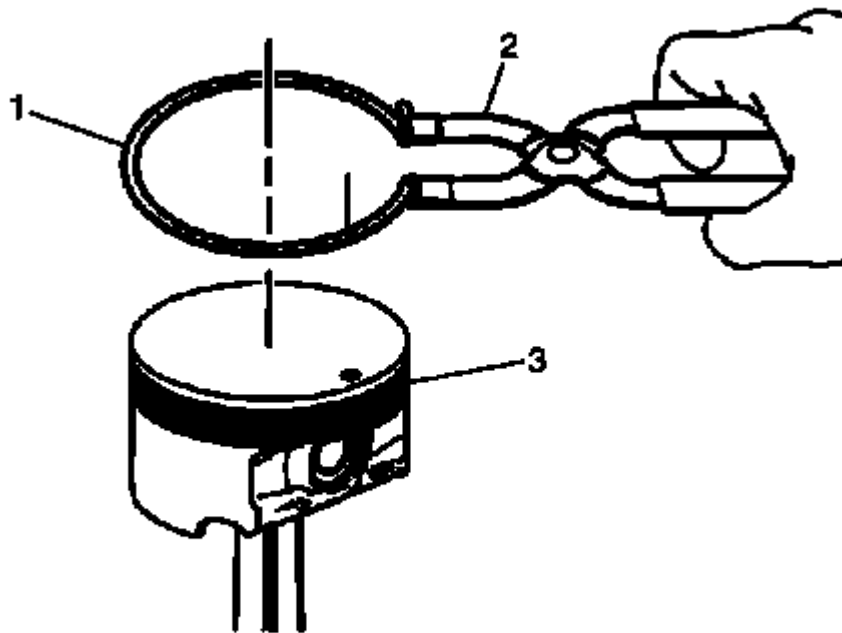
View Of Ring Expander, Second Piston Ring & Piston
